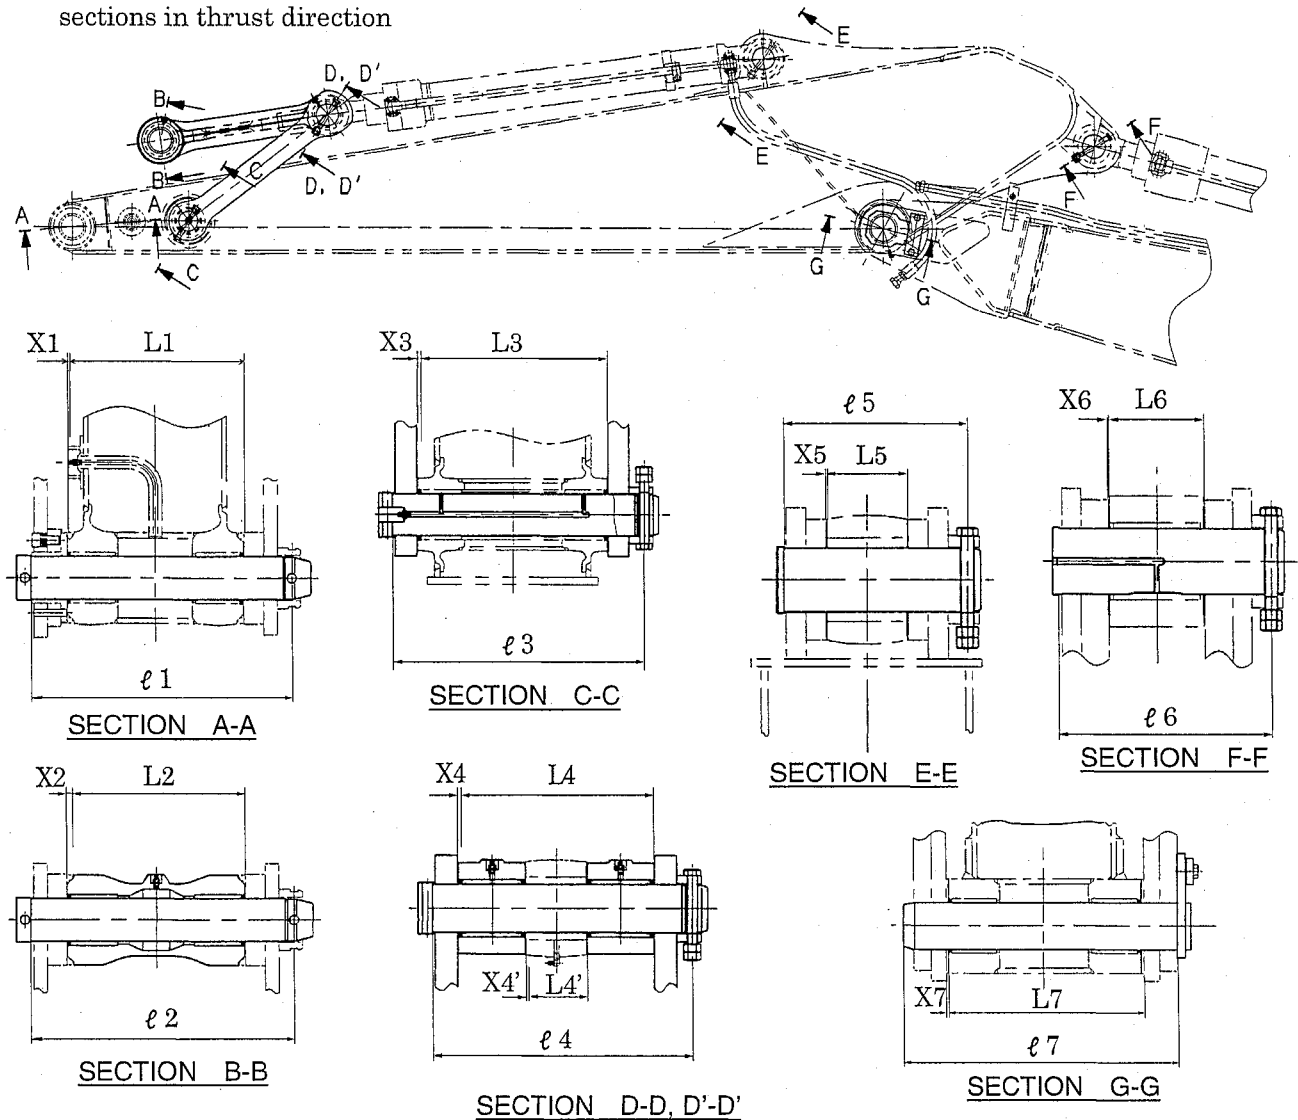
Clearance of arm and cylinder installing sections in thrust direction
